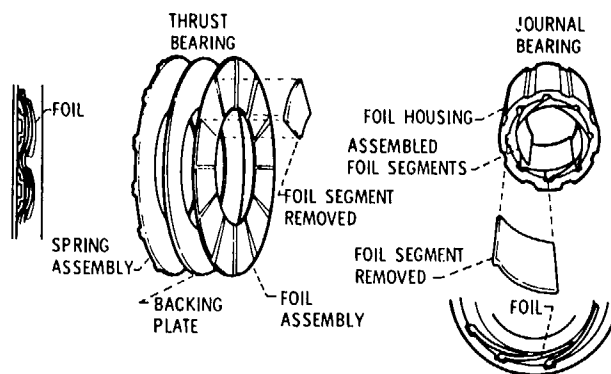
Cantilevered foil bearings (Garrett Corp.). (From ref. 56.)
